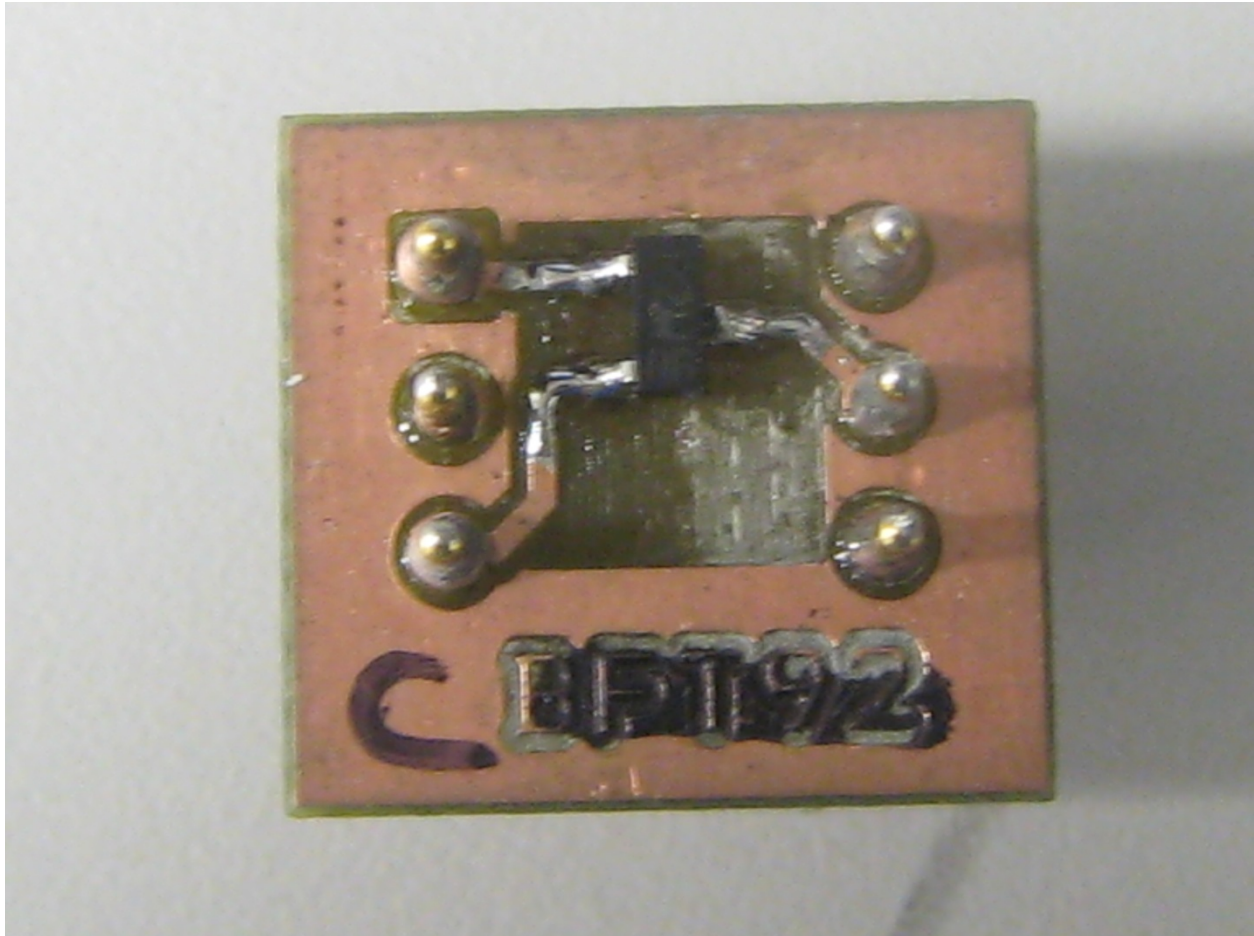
Photograph of the BFR92A mounted on an adapter board, which in turn was inserted into a test socket.
